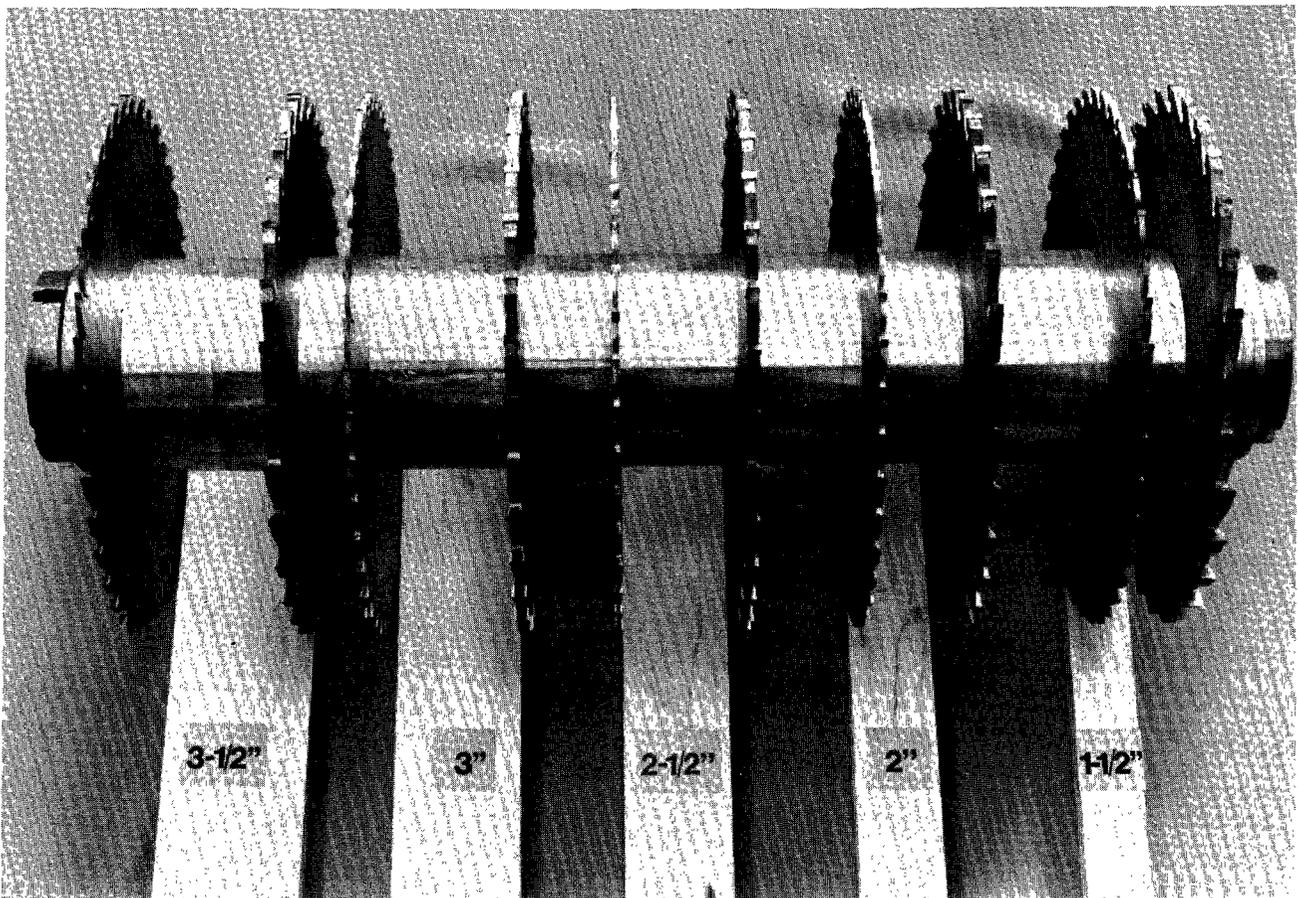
The arbor of the dip-chain fed gang edger contains five pairs of blades.
